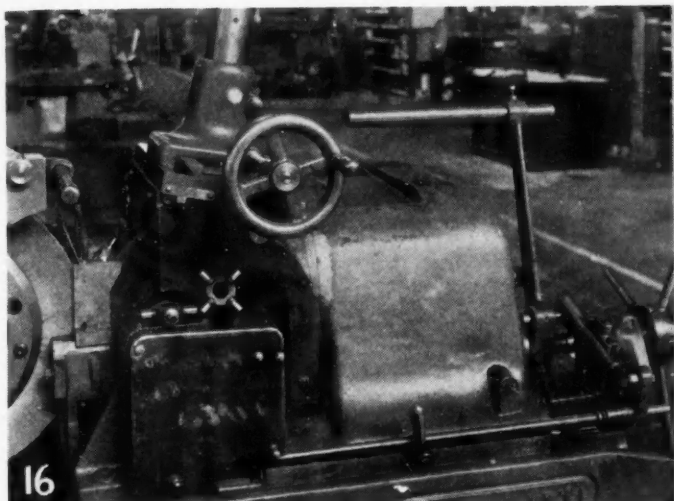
Set-Up for In-Feed Centerless Grinding of Universal-Joint Spiders
